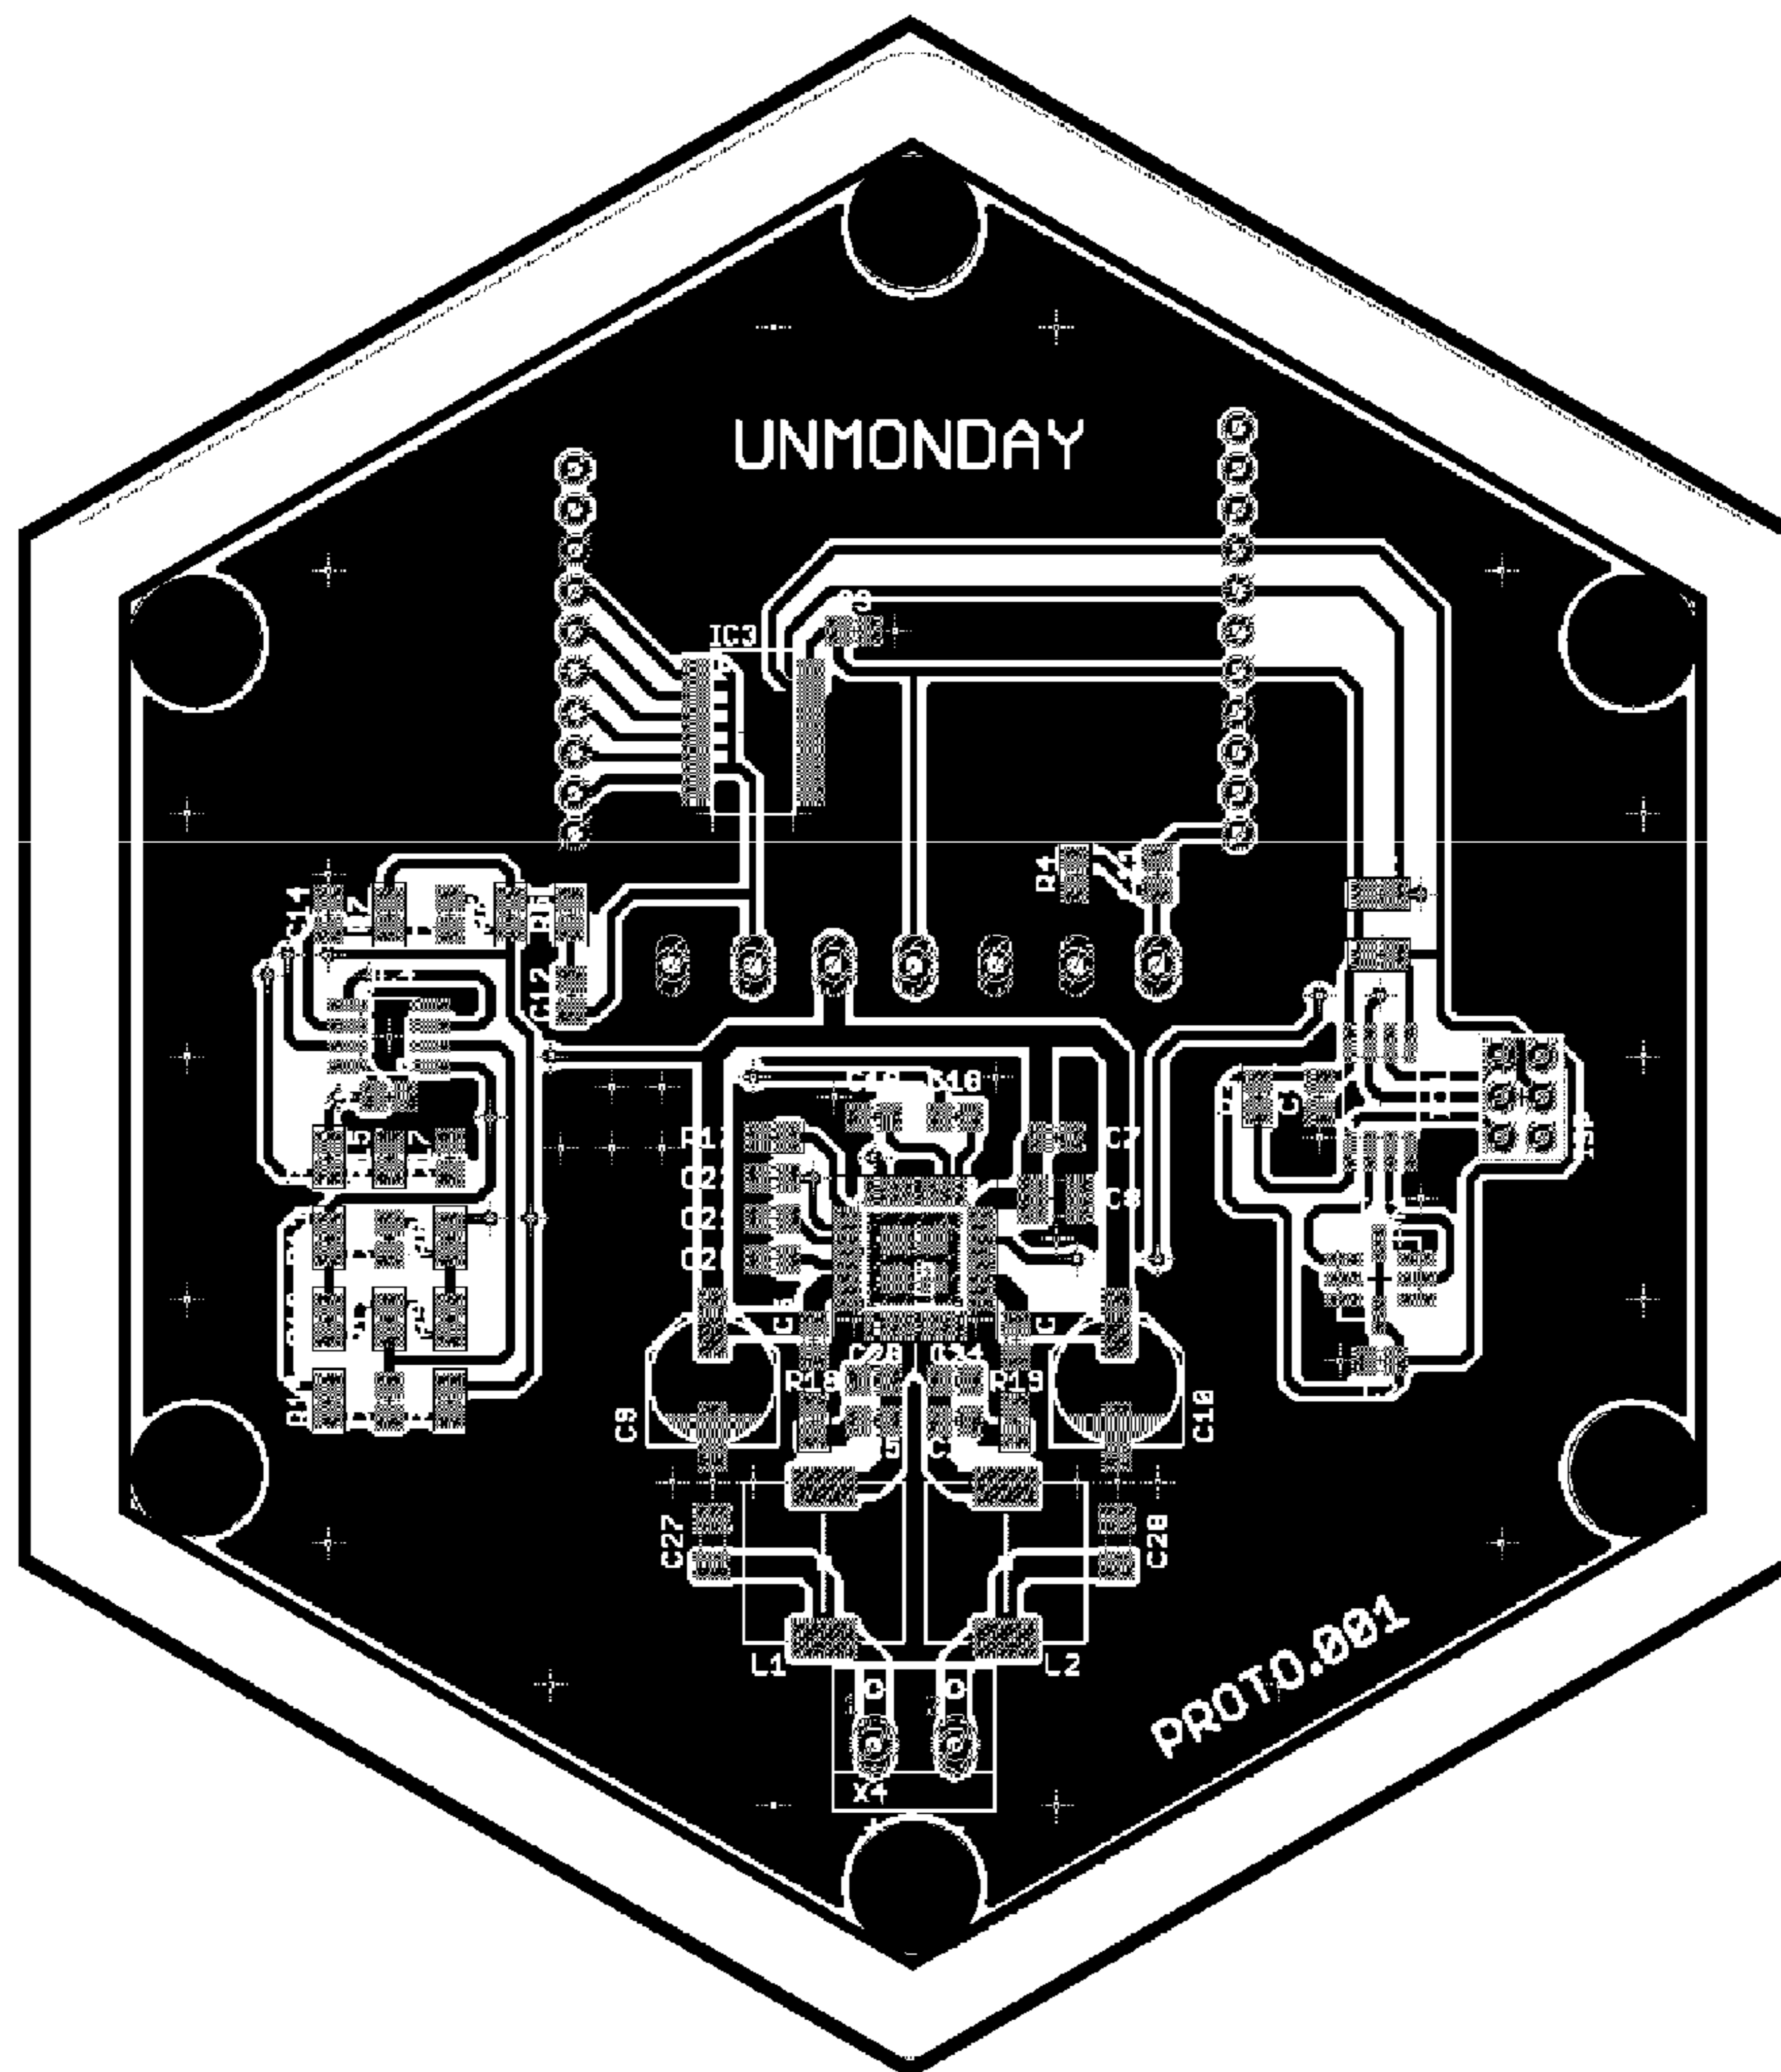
is a top view of the printed circuit board for a mobile speaker unit; and,
